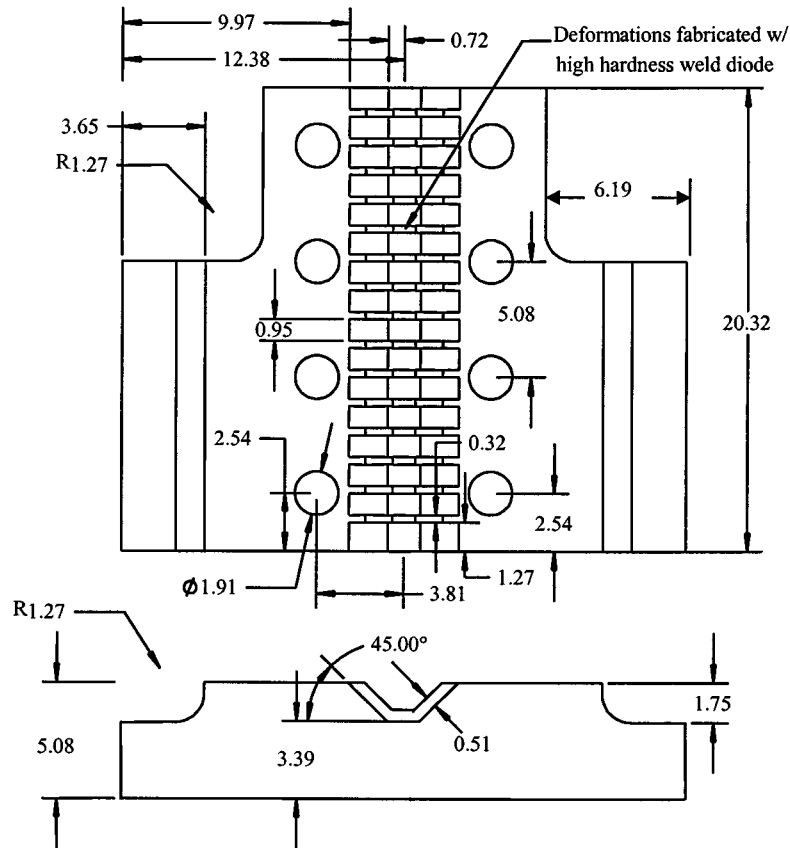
Detail drawing of prototype grip (all units in cm)
